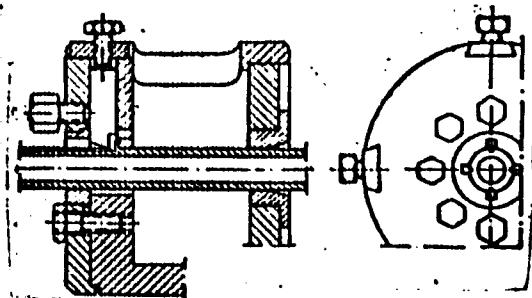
Yoke for drawing longitudinal channels on the outer surface of pipes.
